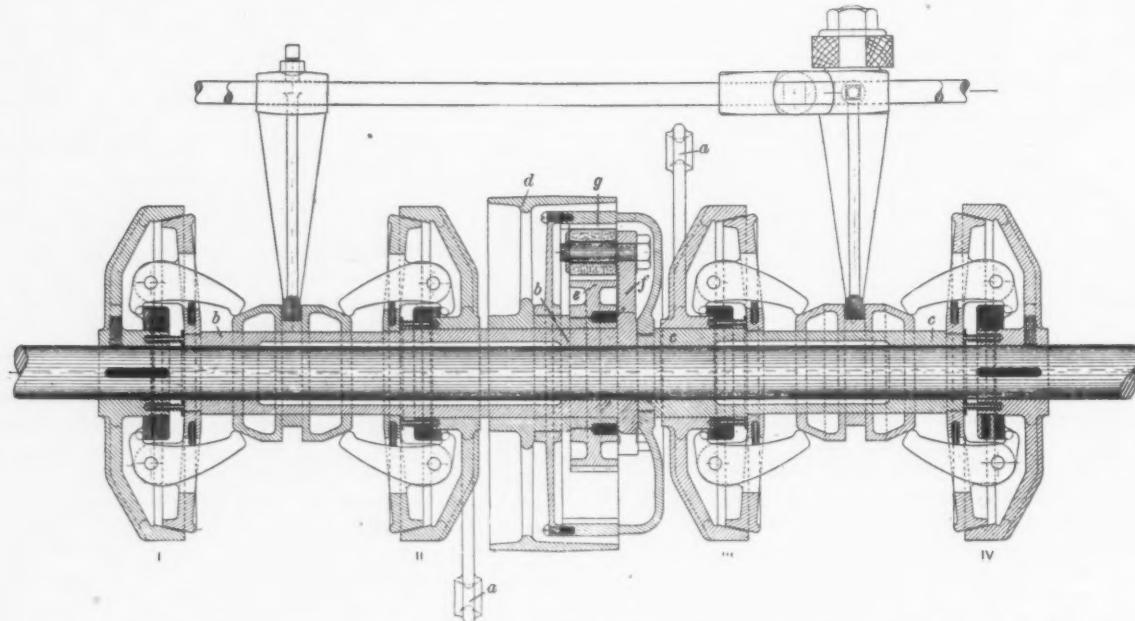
Sectional View of the Speed Changing Mechanism of the Smith Triple Speed Countershaft.
